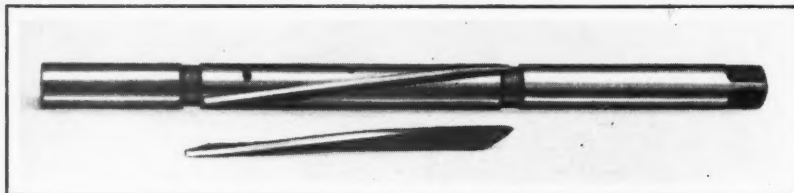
"Red-Line Holefinisher" with a Single Spiral Adjustable Blade
